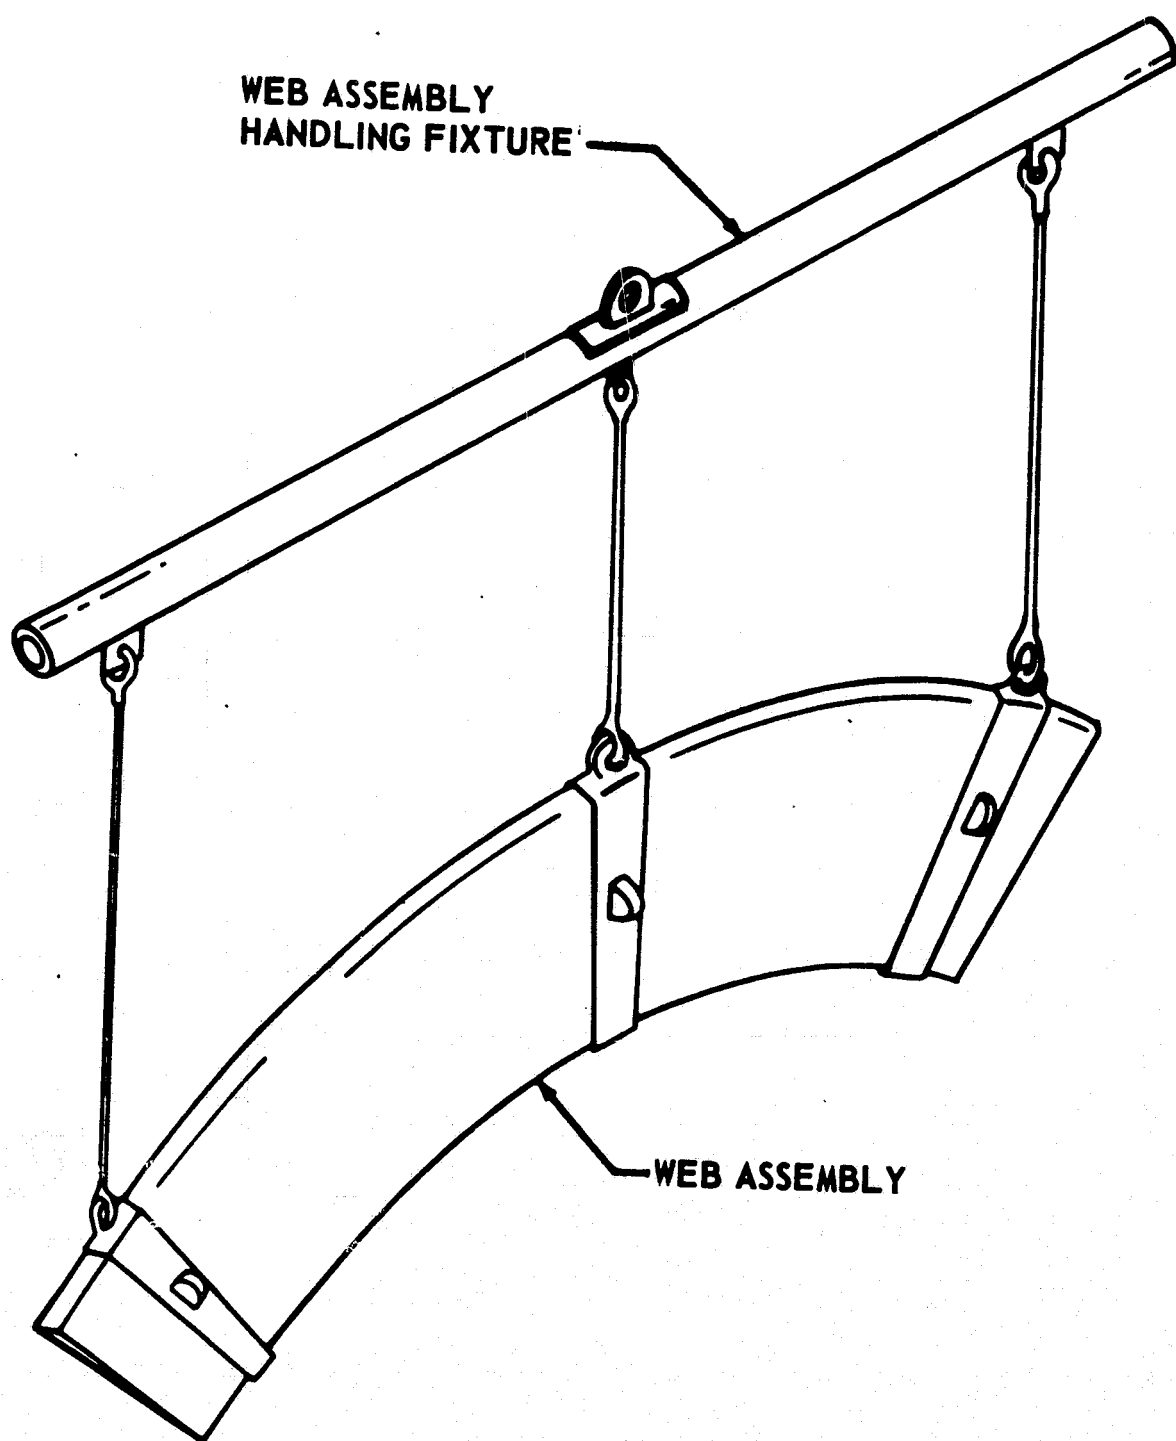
INJECTION STAGE RING SEGMENT ASSEMBLY HANDLING FIXTURE
